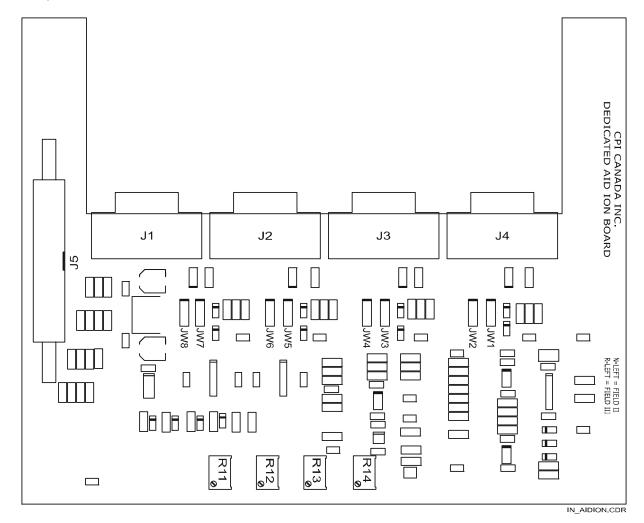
D-7: Dedicated ion chamber AEC board (assembly 737998)
